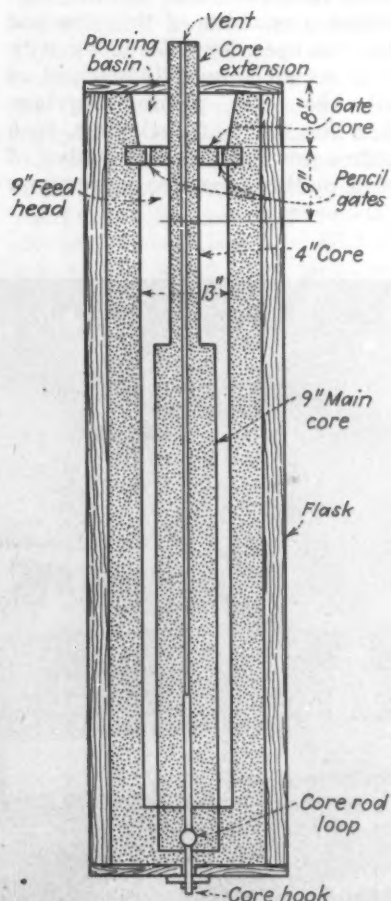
Cross-section view of a 132-in. alloy roll mold showing position of gate core and core hook.
